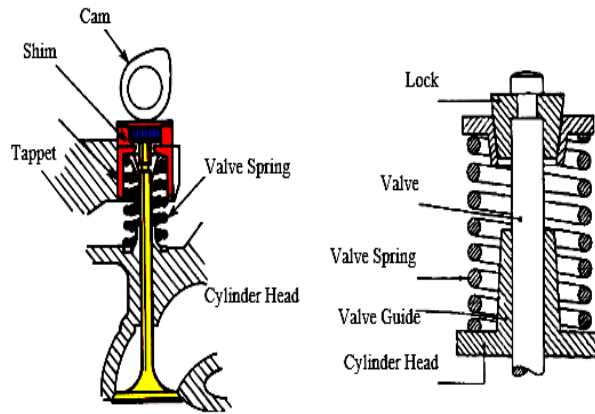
54 Assembly and Construction of a Valve Spring [37]
